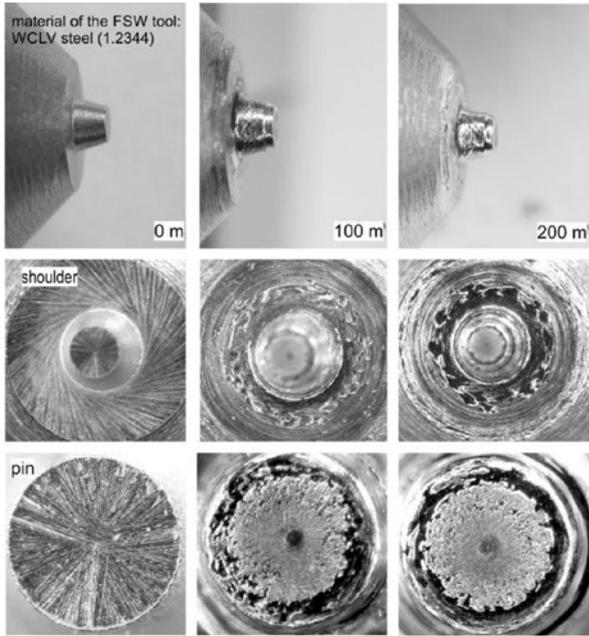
Visual inspection of the working surface of the FSW tool made of 1.2344 steel following individual stages of wear tests
